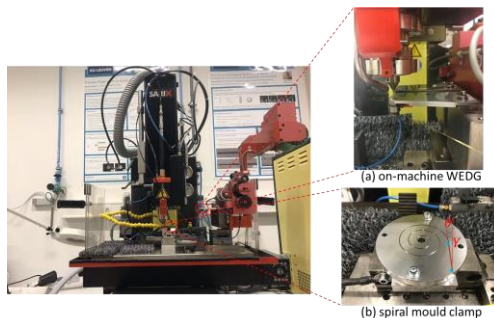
micro-EDM set-up for micro-dimples texturing. Zoom-in figures shows (a) WEDG set-up and (b) the clamping of spiral mould on a vise
